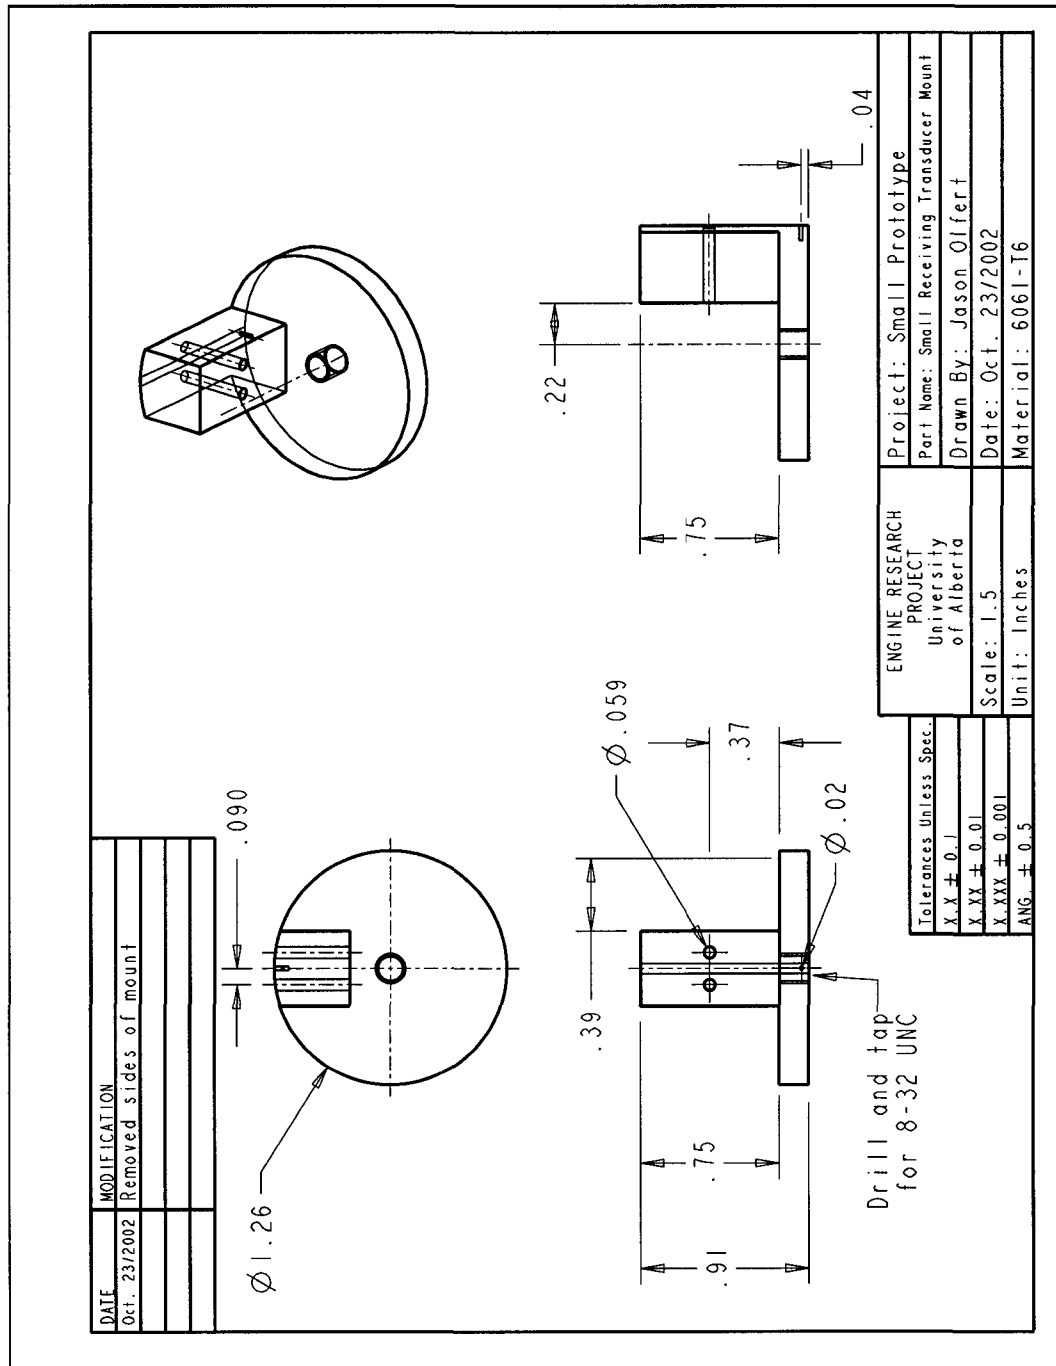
Drawing of Small Receiving Transducer Mount of Small Prototype
